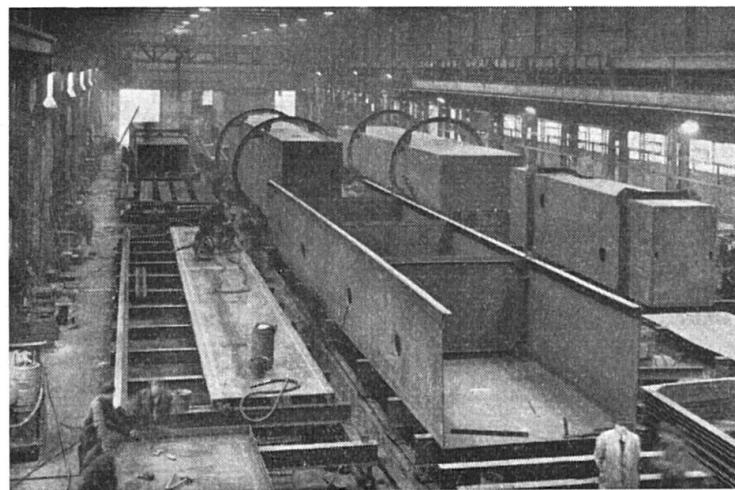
Purpose Made Manipulators in Use for Welding Pontoons.
